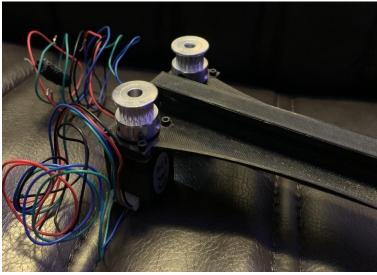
Motor Mounts used in the Inverted H-Bot assembly
